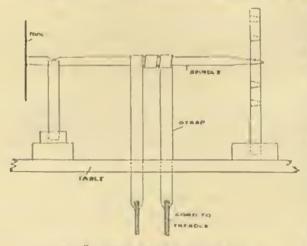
DEVICE FOR ROTATING TOOLS.
